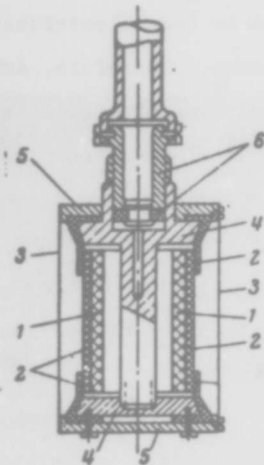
Diagram of the fastening of the sensitive cylindrical piezoelement with tangential polarization to the holder. 1) cylindrical piezoelement; 2) rubber covering; 3) external mesh shield; 4) internal metallic part; 5) constructive parts; 6) stuffing box for lead-in of the cable.
